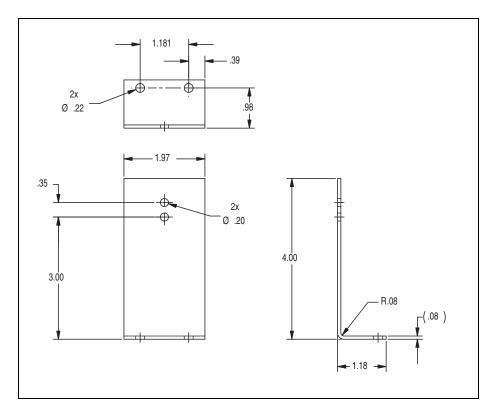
Dimensions for Fabricating User-Supplied Stay
